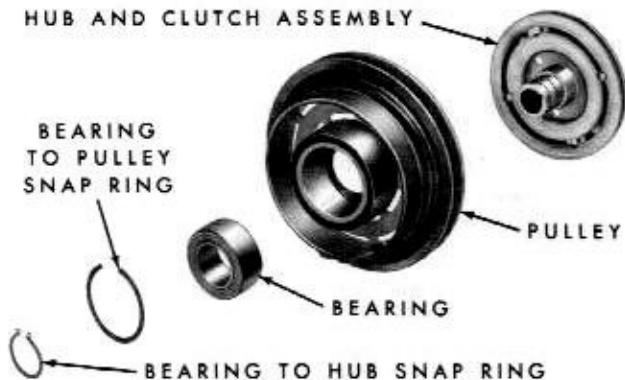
Magnetic Clutch Disassembled—Warner
